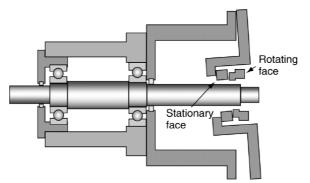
Notice the Effect of Angularity of Seal Housing on Seal Faces in this Exaggerated View
